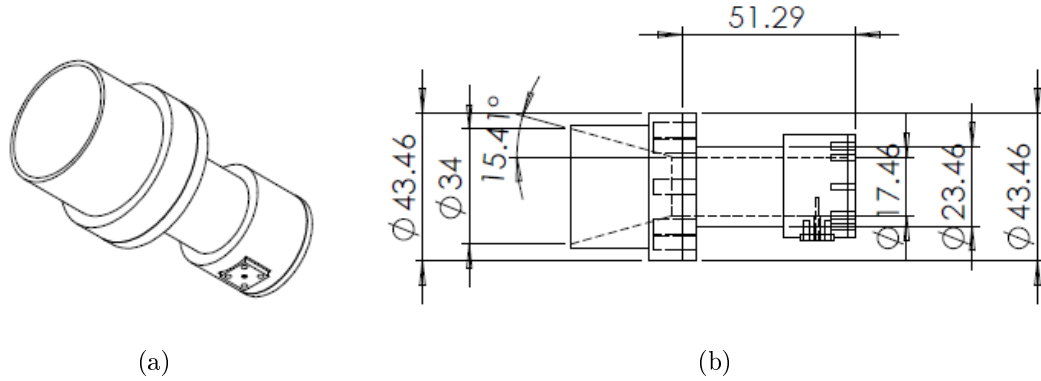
A conical horn structure with all dimensions in millimeters. (a) Prospective view. (b) Side view.
